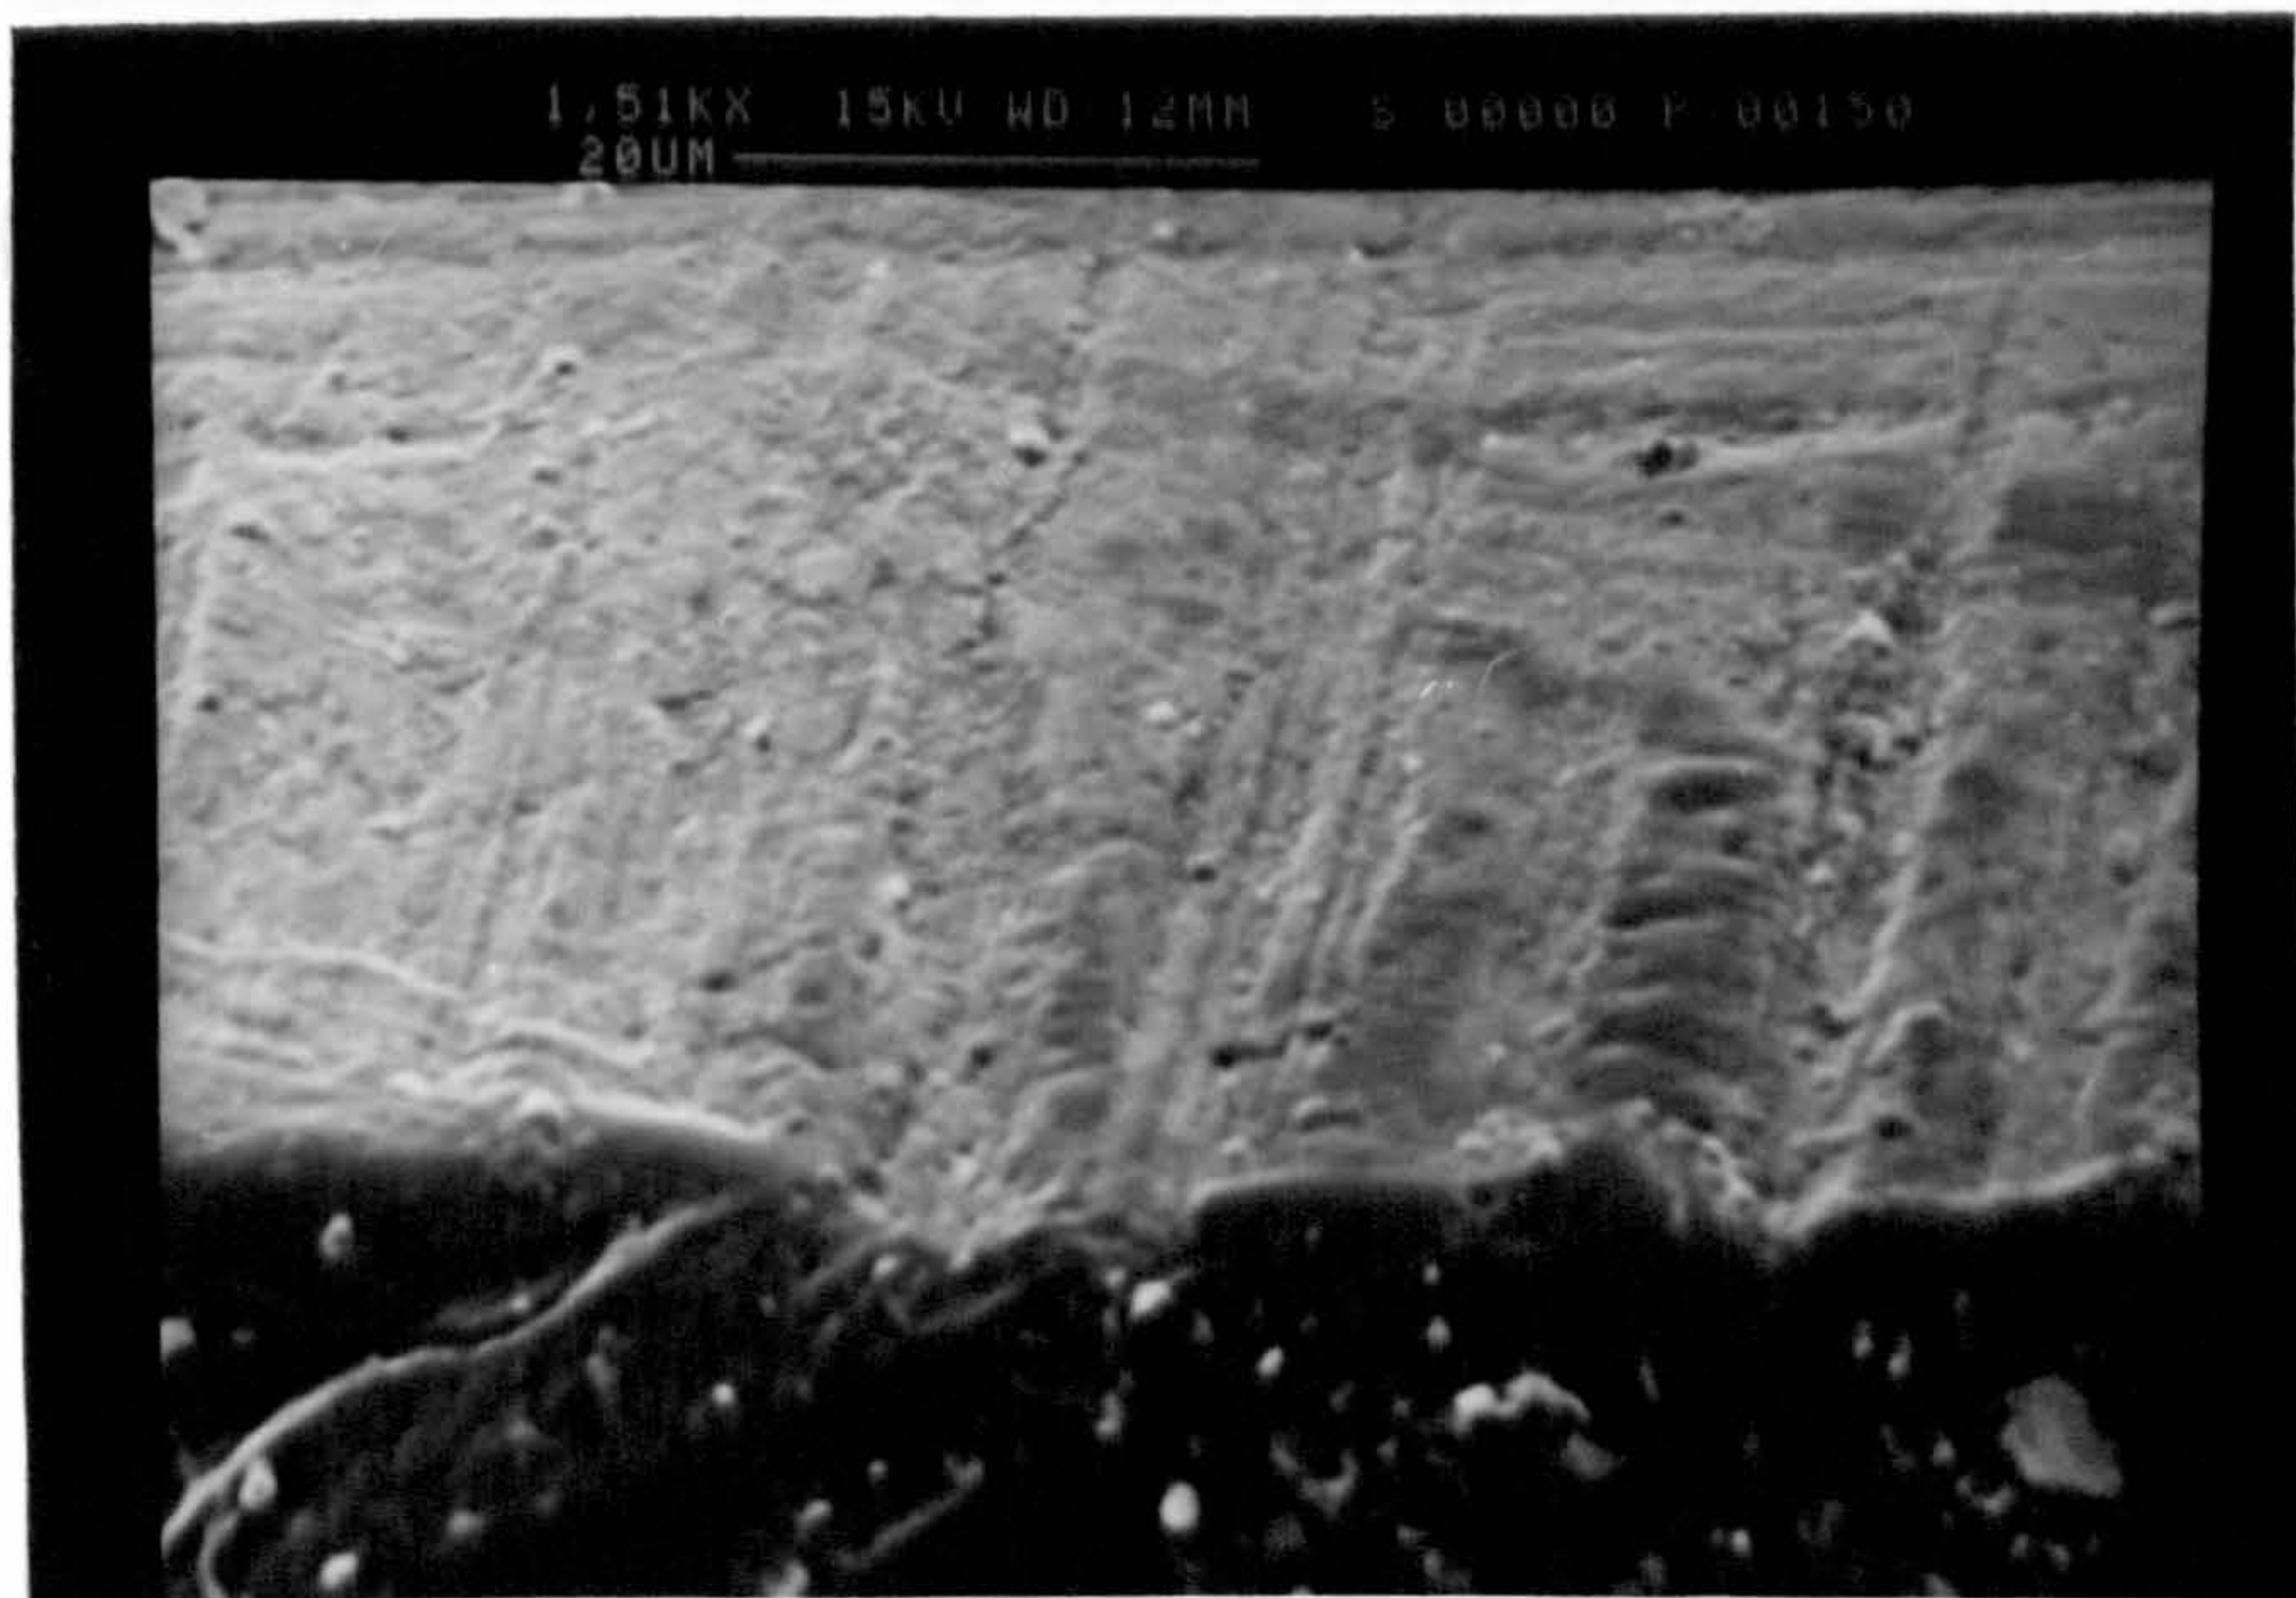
Rake face of worn HSS tool showing intermittent grooves (Speed = 150 m/min, feed = 0.20 mm/rev, cutting time = 1 min)
